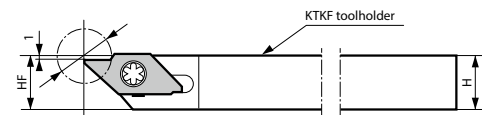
When a TKF-AS / -ASR insert is attached (The cutting edge is 1mm lower than the center line)
